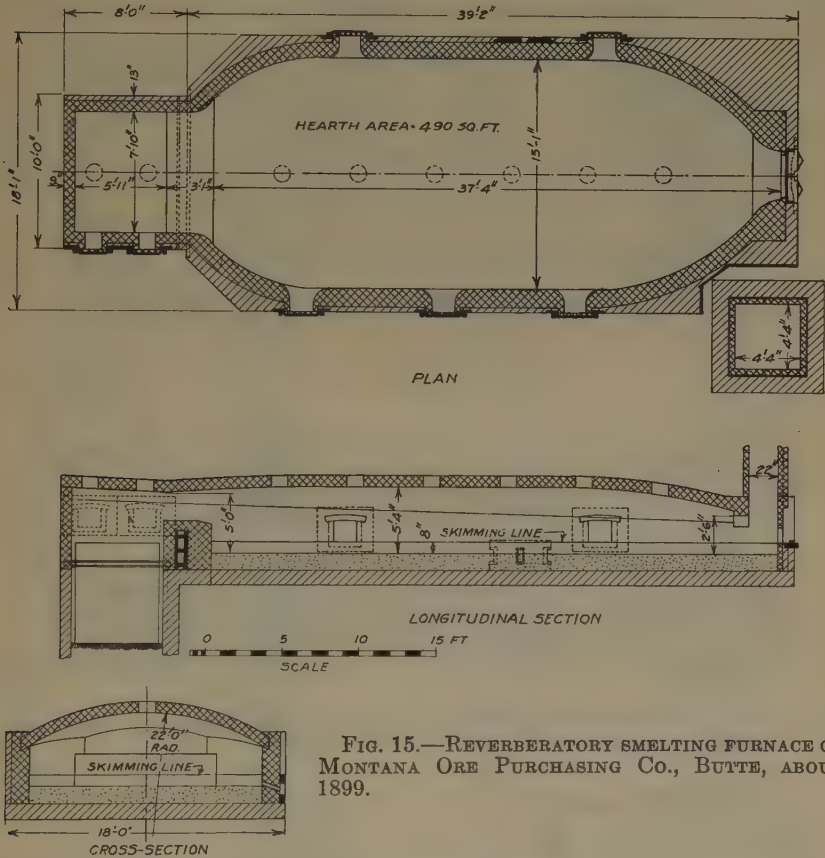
REVERBERATORY SMELTING FURNACE OF MONTANA ORE PURCHASING CO., BUTTE, ABOUT 1899.
